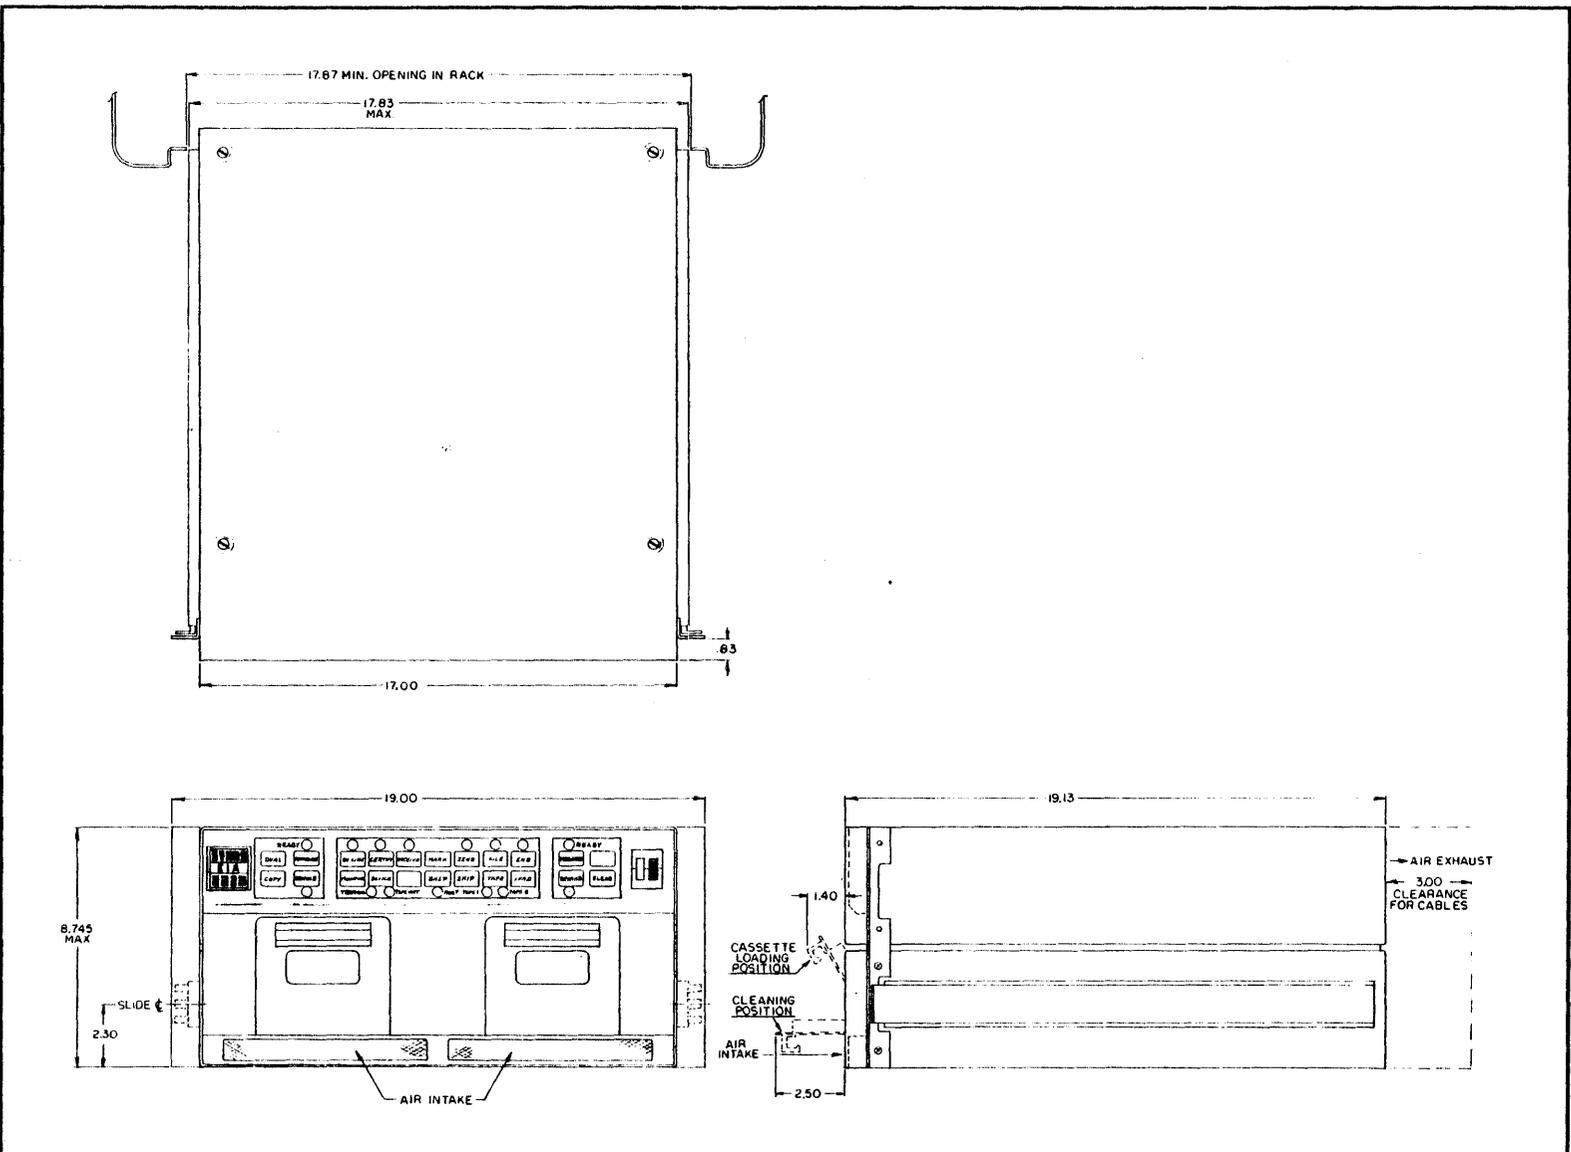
DIMENSIONS - RACK MOUNTABLE UNITS
